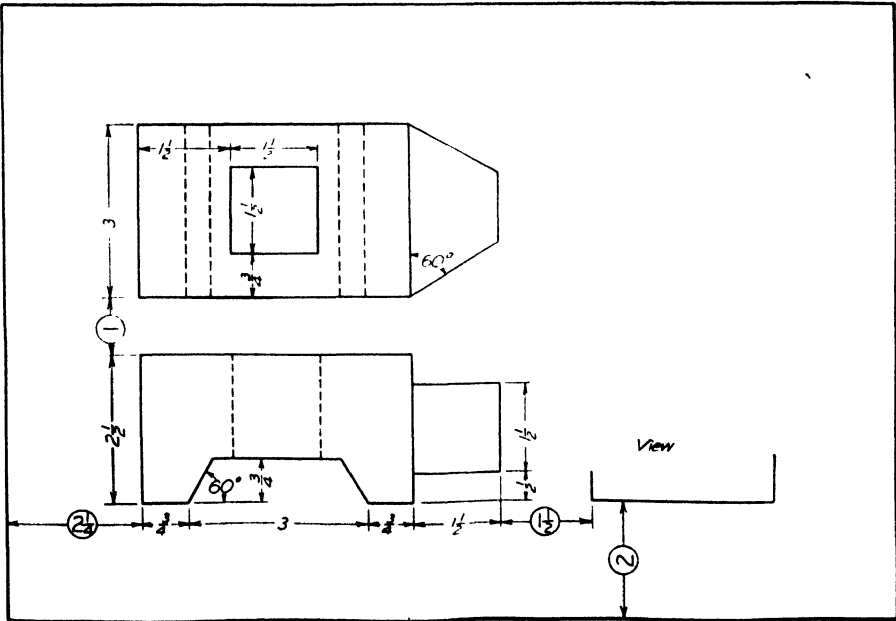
Prob. 116. Draw three views of the *locating support*.
